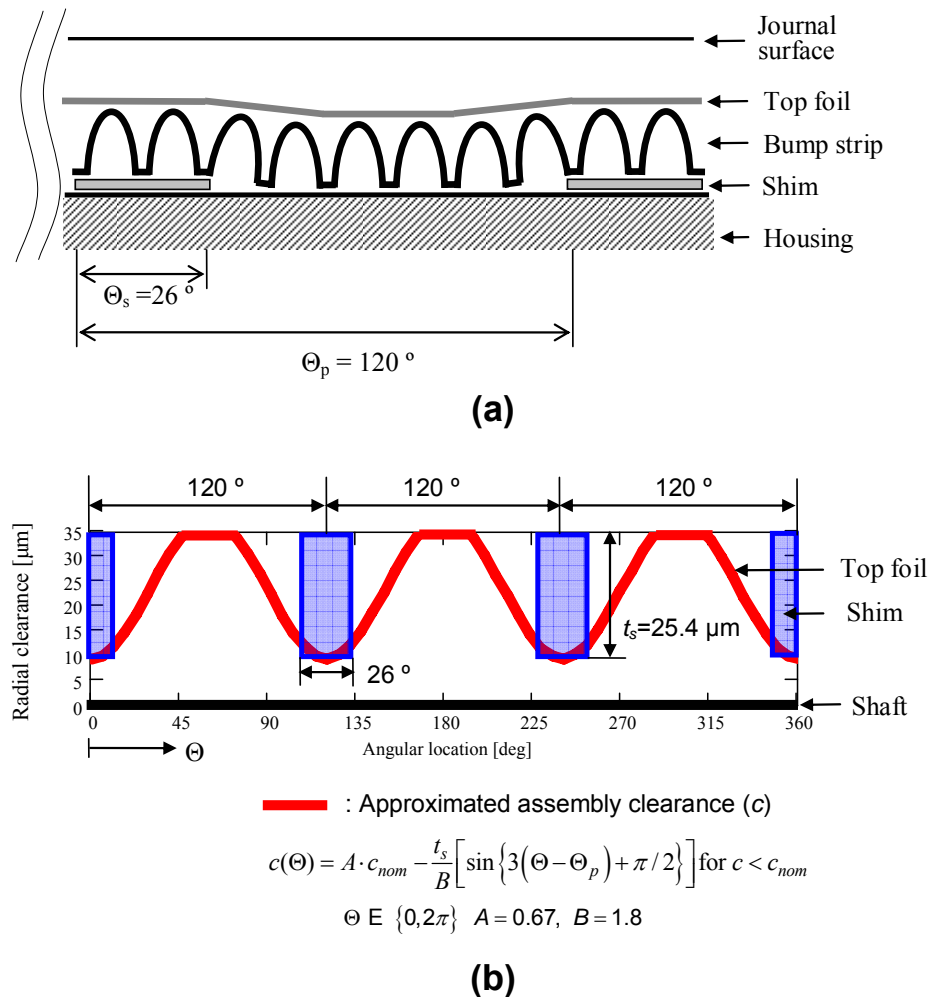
Locations of three shims relative to top foil spot-weld in test bearings
